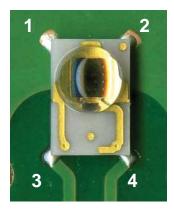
LUXEON Rebel reflowed into PCB with four solderability indicators.
